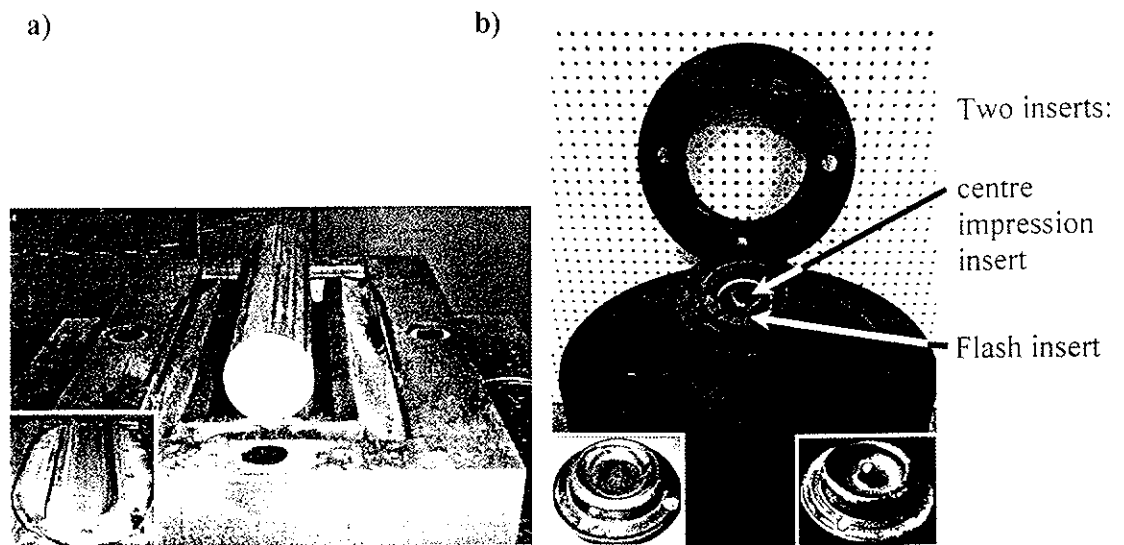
a) Die to forge oblong parts with H-shaped cross-section and b) modular forging tool with exchangeable centre part and flash saddle to forge axisymmetric parts.
